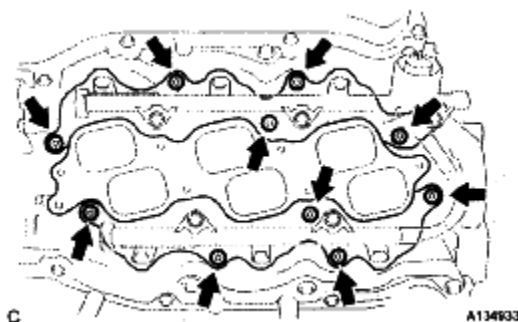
Identifying Port Holes Of Gasket & Cylinder Head
